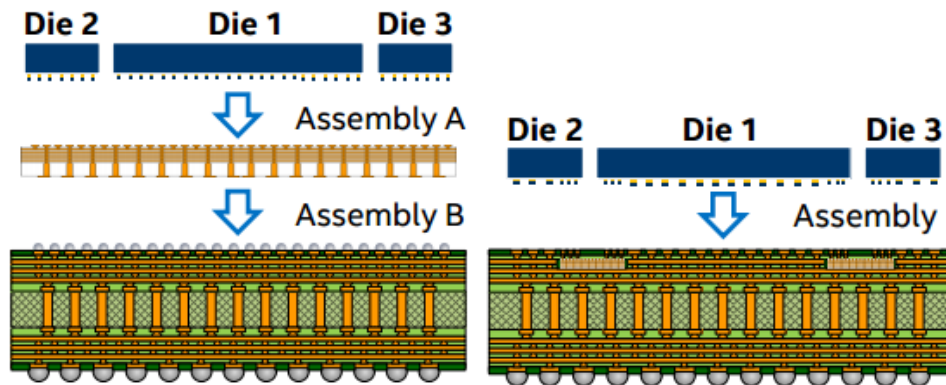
Conventional 2.5D assembly (left), Intel's EMIB assembly (right).
